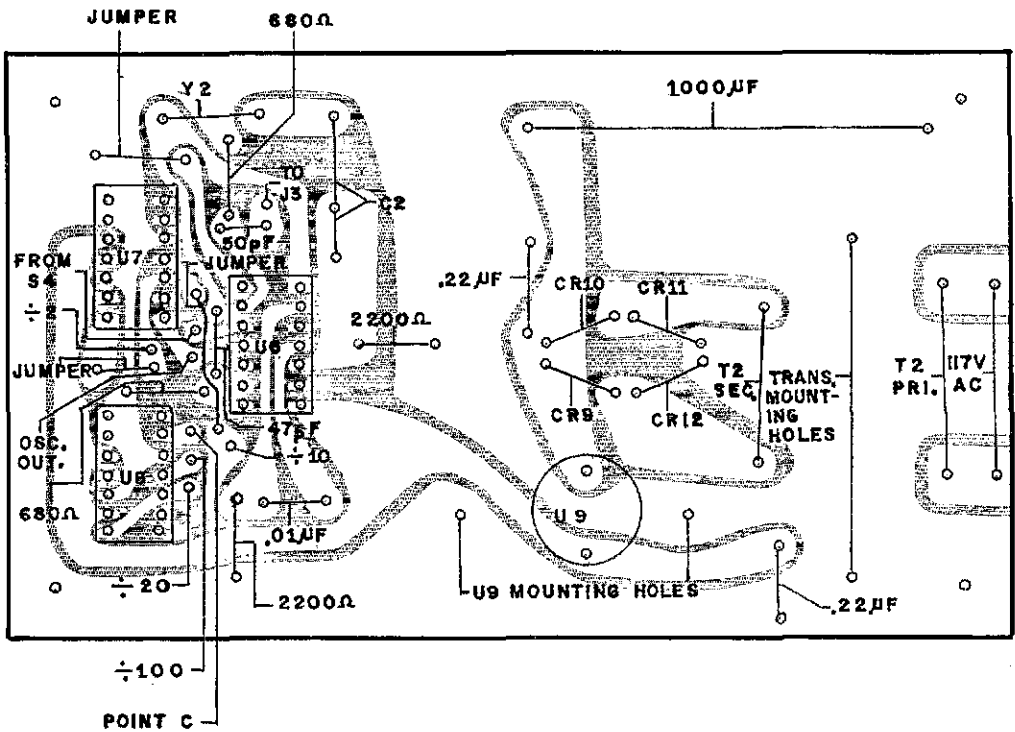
Full-size circuit-board pattern and parts layout diagram.
